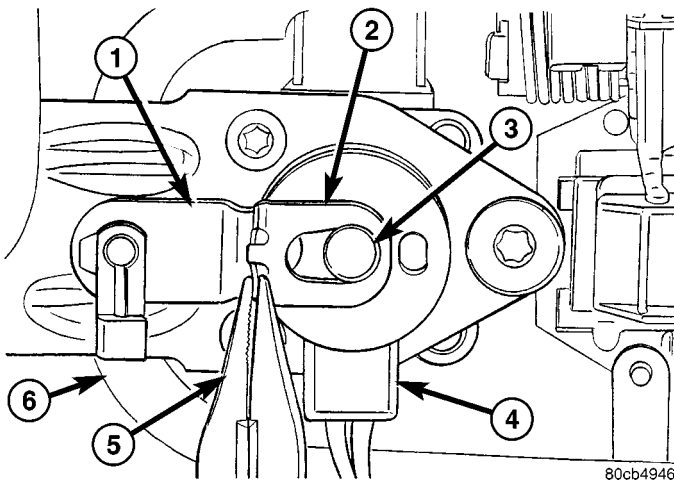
Lock Cylinder Lever Retainer Remove/Install
